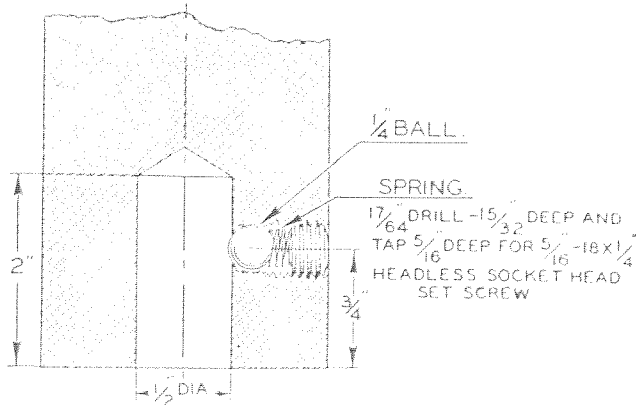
Specifications for Preparing Ram of Arbor Press to Fit Tool Parts
